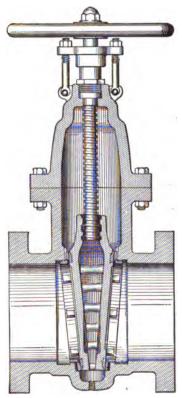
Iron-Body Gate Valve with Renewable Seat Rings.
